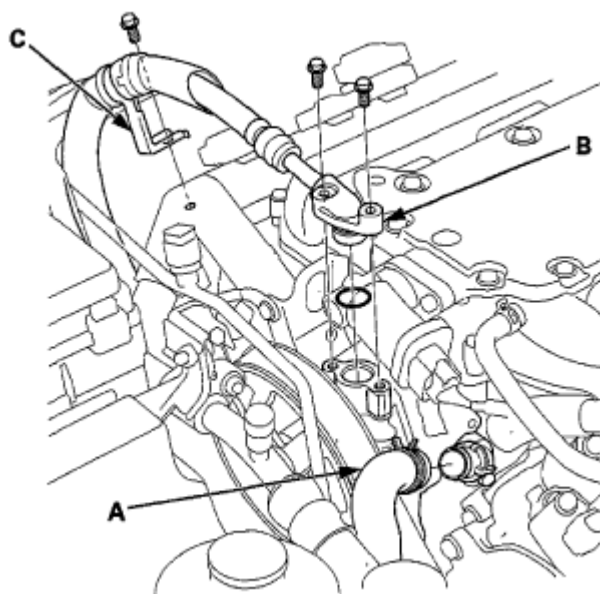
Identifying Power Steering Pump Inlet Hose, Power Steering Pump Outlet Hose And Power Steering Hose Bracket
